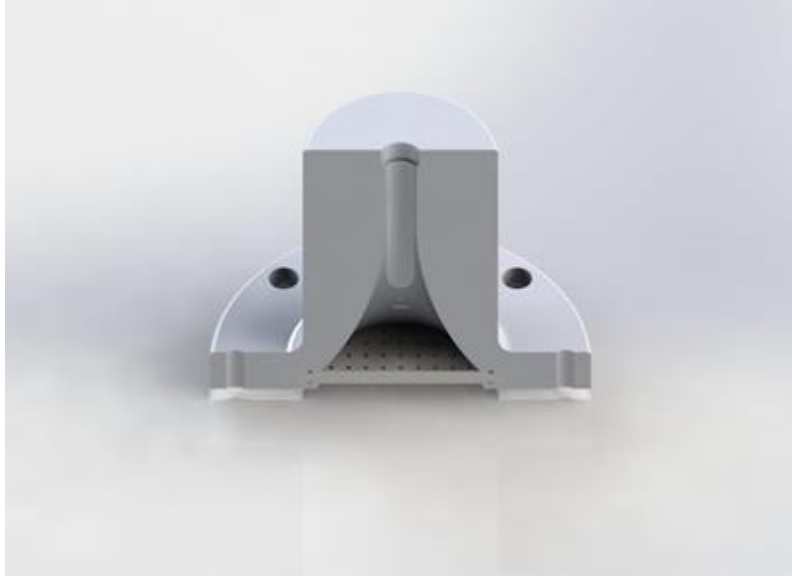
Solid Works Rendered Image of Fluid Containment Assembly
